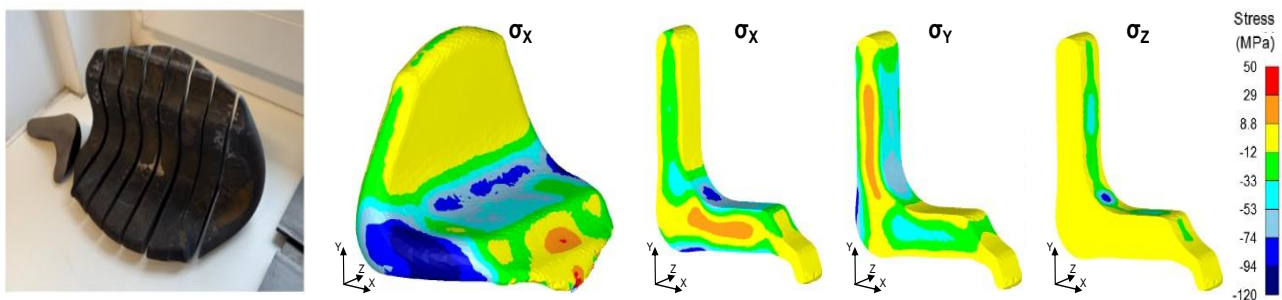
Demonstrator workpiece cut into 20 mm thick blanks by EDM; Initial residual stress simulation after heat treatment for full demonstrator; initial residual stress result for specimens after EDM
